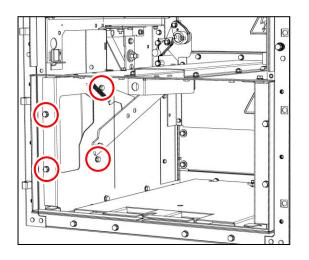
4 bolted joints on metal cover in voltage transformer compartment
